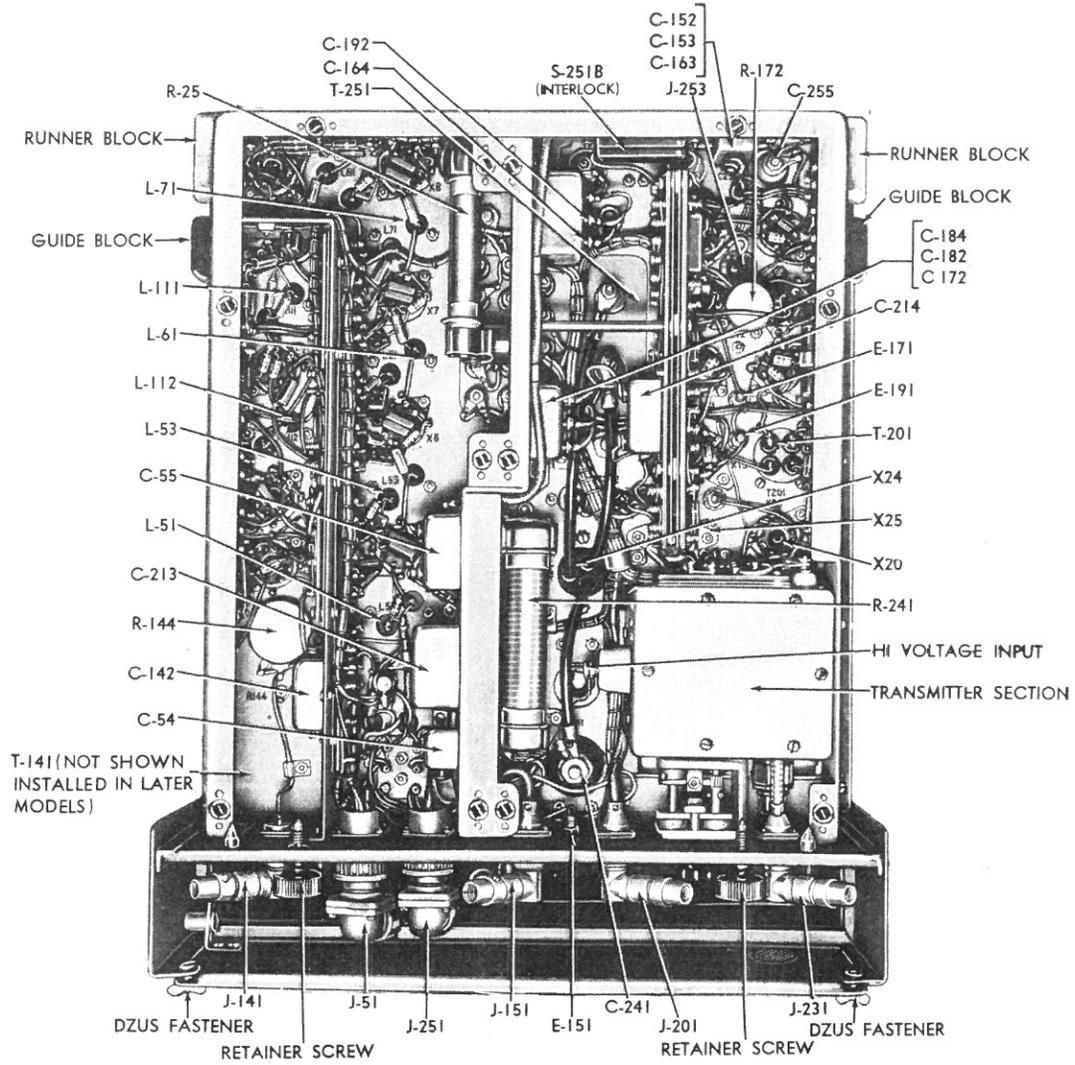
Model BN Equipment Bottom View Cover Removed
